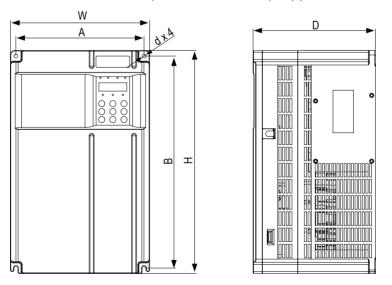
Overall and mounting dimensions of MD290T45G/55P(B) to MD290T160G/200P and MD290-2T22G/30P(B) to MD290-2T55G/75P
